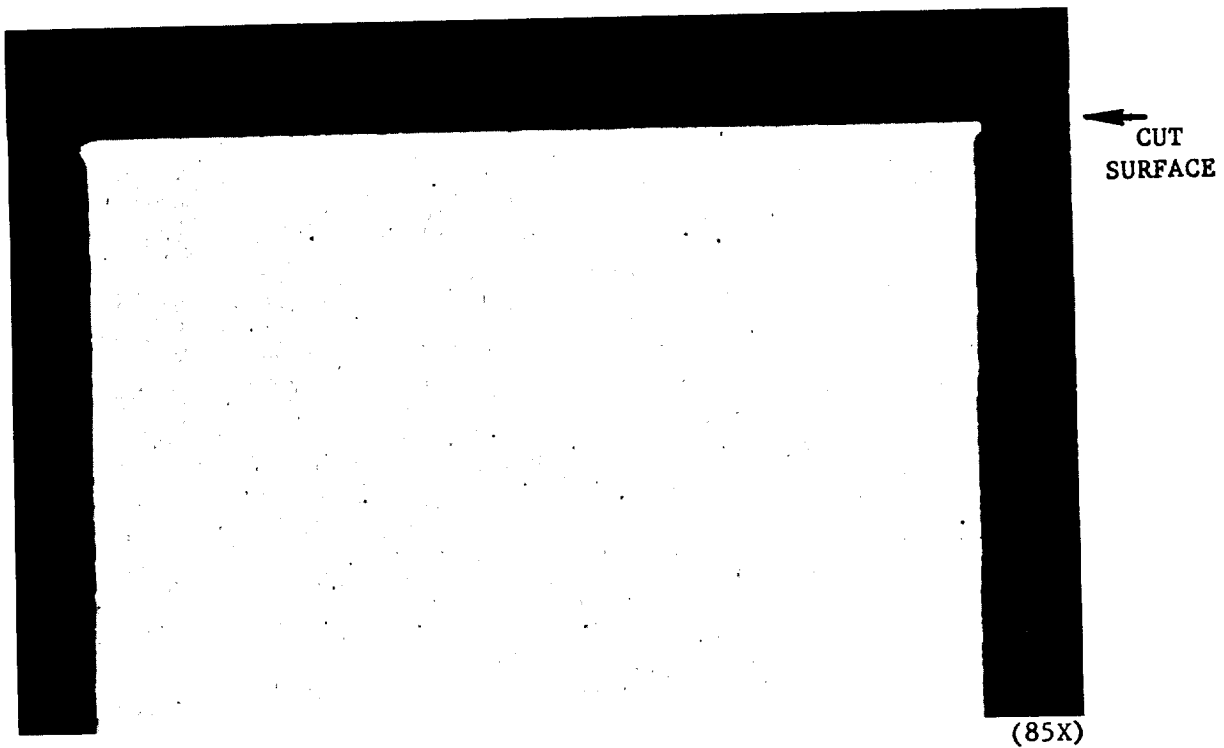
CROSS-SECTION OF SURFACE CUT ON ABRASIVE WHEEL USING COOLANT. FEED RATE 4.0 IPM AT 8,240 SFM.
